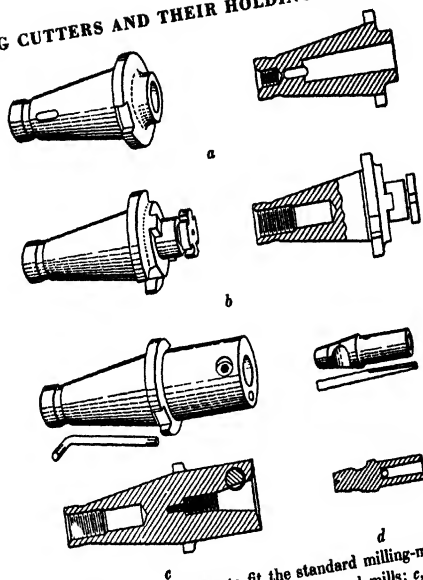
Examples of adapters to fit the standard milling-machine spindle; *a*, for regular taper-shank end mills; *b*, for shell end mills; *c*, for the smaller Brown & Sharpe cam-lock collets, as in *d* or for end mills, etc., having cam-lock taper shanks.
